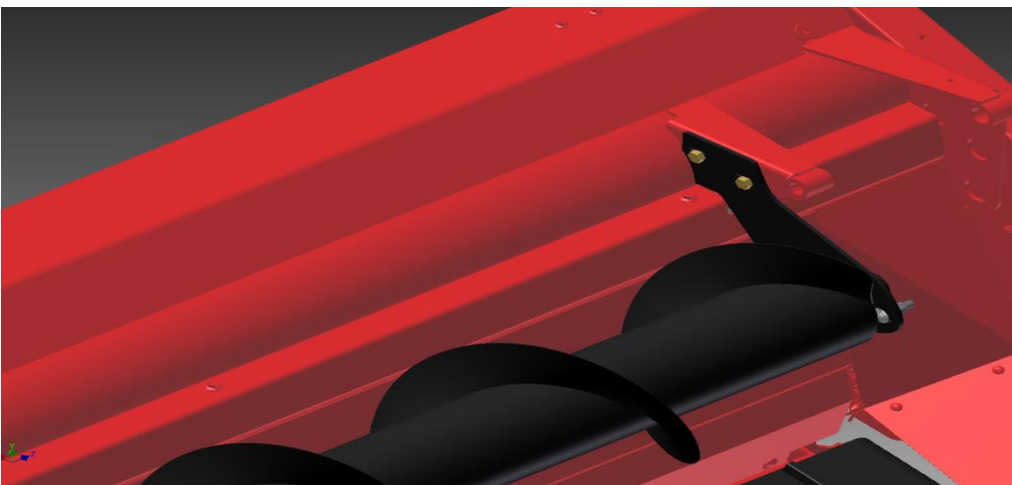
LH AUGER END MOUNTED ONTO THE HEADER USING THE 1/2 X 1-1/2 BOLTS.
